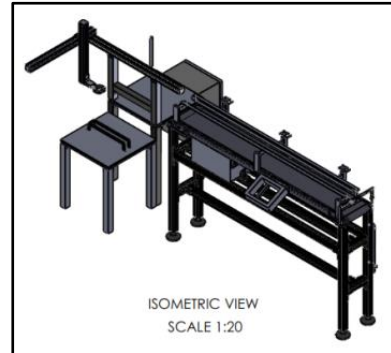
3D Drawing of Cartesian Robot & Buffer Conveyor
